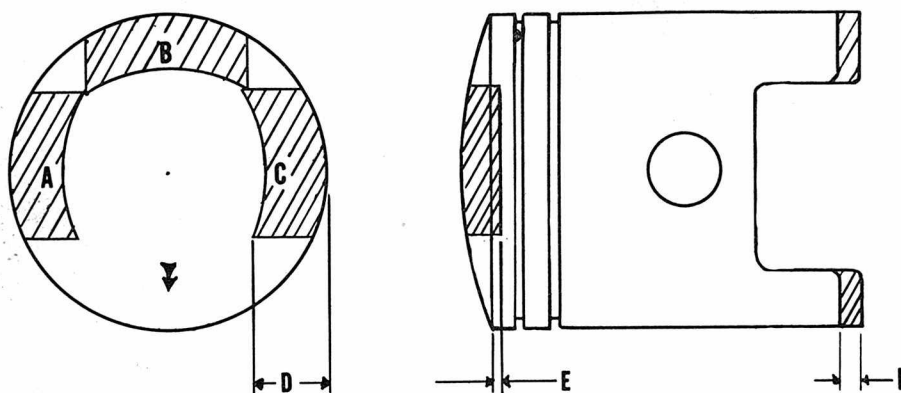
Areas of piston to be modified. Cuts (A, B & C) should only be as wide as transfer ports and extend 10 MM across top of pistons. Cuts should be 2 MM deep at edge of piston and taper to zero at end of cut.
